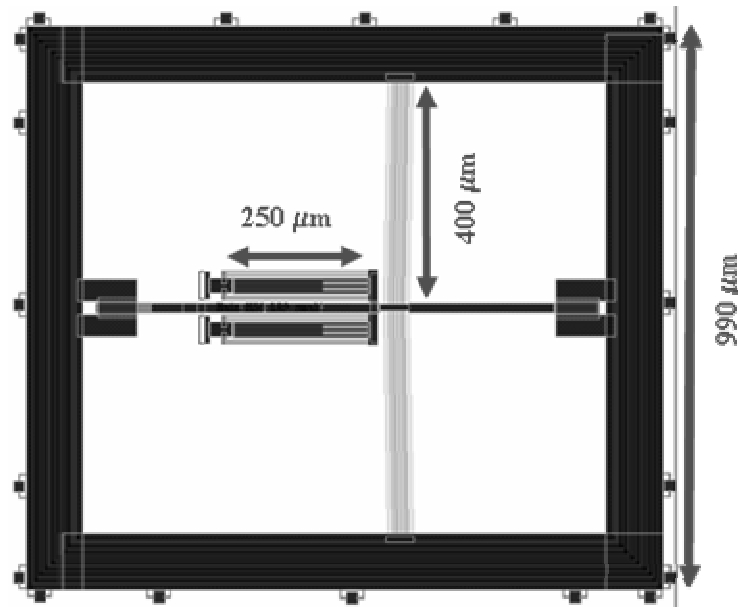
L-Edit layout showing the dimensions of the LR400-8 Laser Microrobot.
